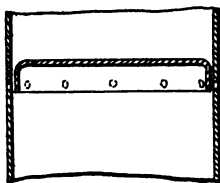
Inserting an intermediate head in a cylinder by means of hole-welding.
